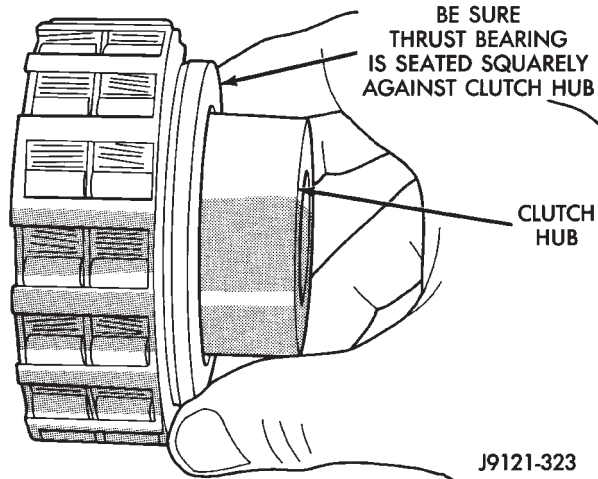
Installing Overrunning Clutch Thrust Bearing
